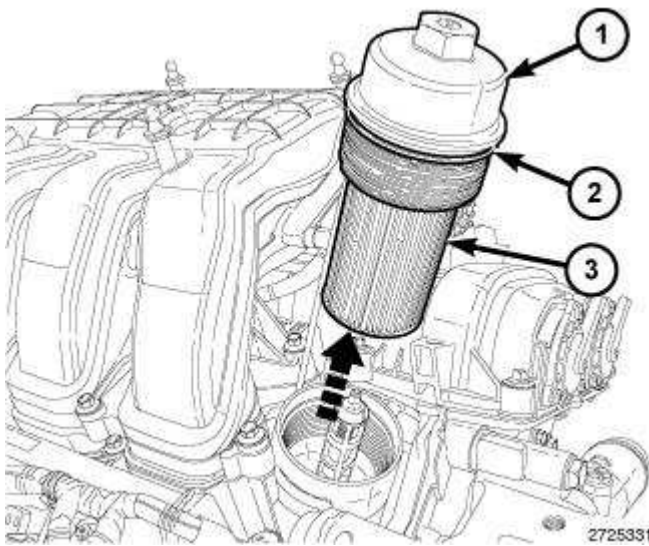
Oil Filter Cap, O-Ring Seal & Oil Filter
